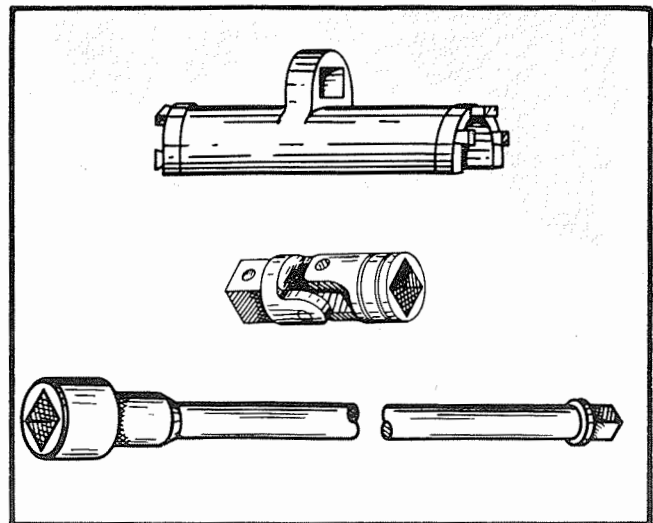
Push Rod Housing Nut Wrench, Universal Joint, and Extension
